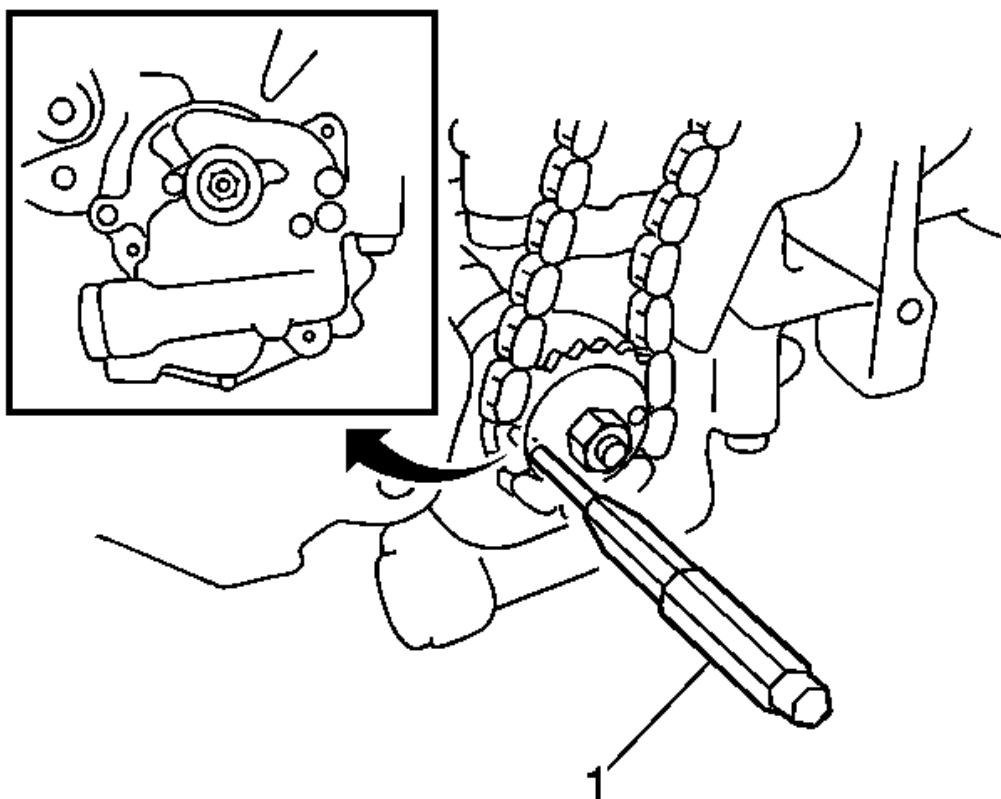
View Of Locking Oil Pump Drive Shaft Sprocket In Position
